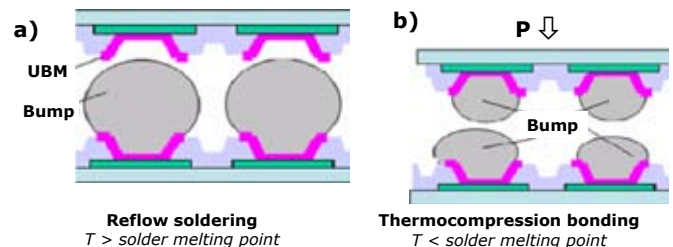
Flip chip techniques a) reflow soldering, b) thermo-compression.
